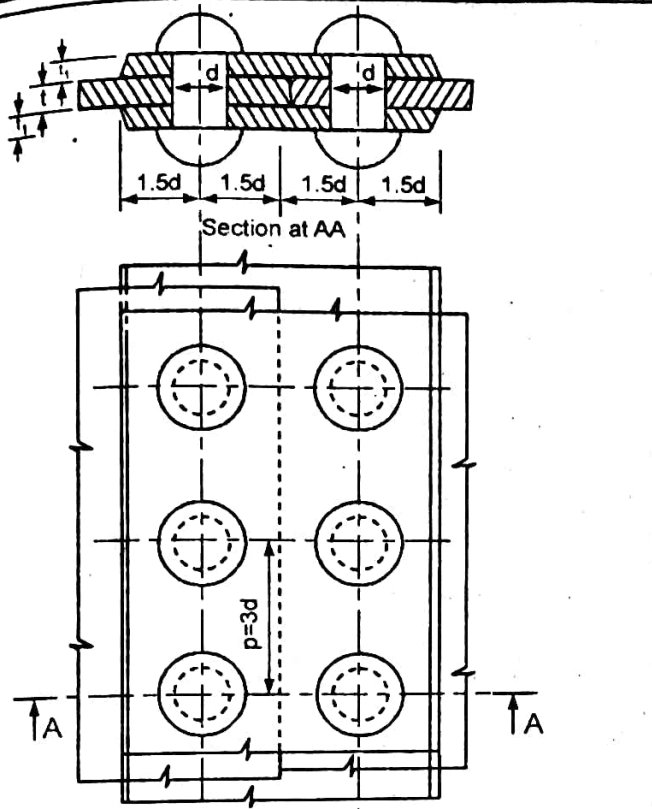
Single Riveted Double Cover Plate (Chain Butt Joint)
